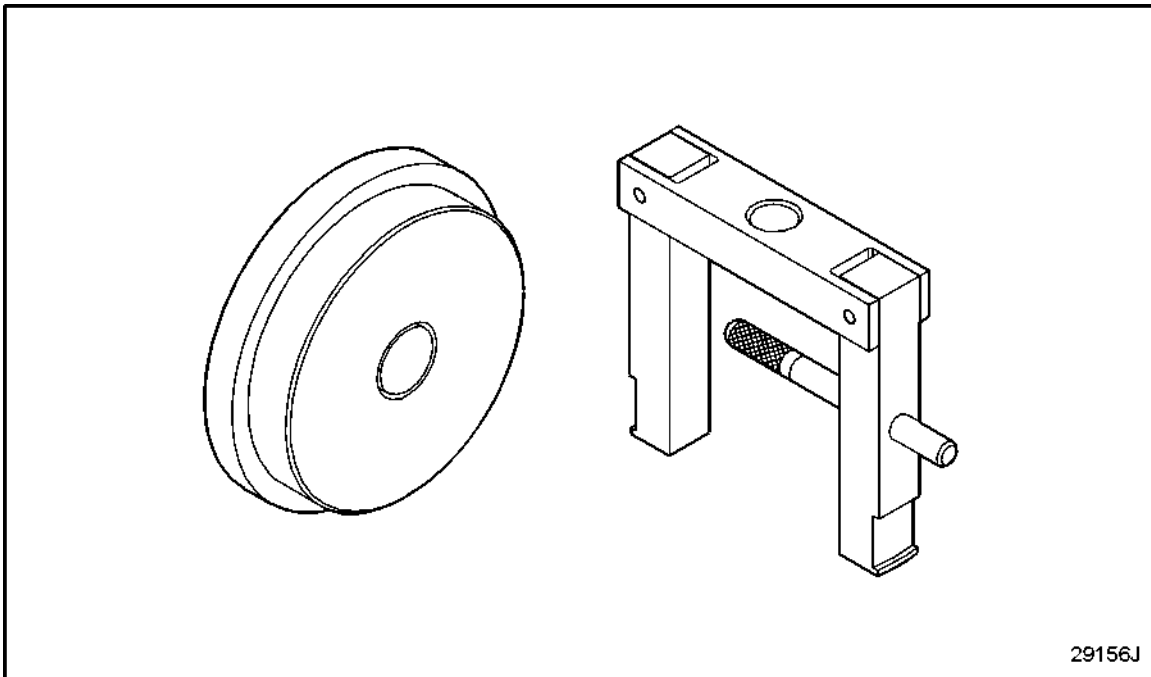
Bushing - Remover & Installer Set,J 29140
